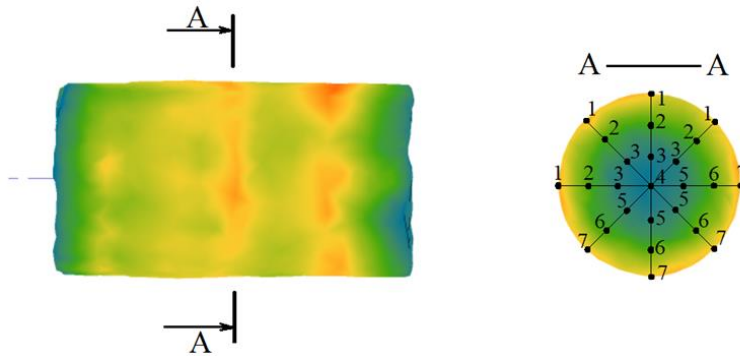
Schematic of radial lines and control points arrangement in the billet cross-section during drawing out.
